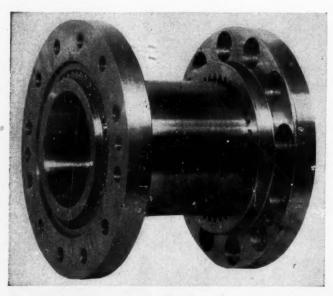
Assembly of distance-piece type coupling. Flanges are attached to corresponding flanges on driving and driven shafts, using fitted bolts
